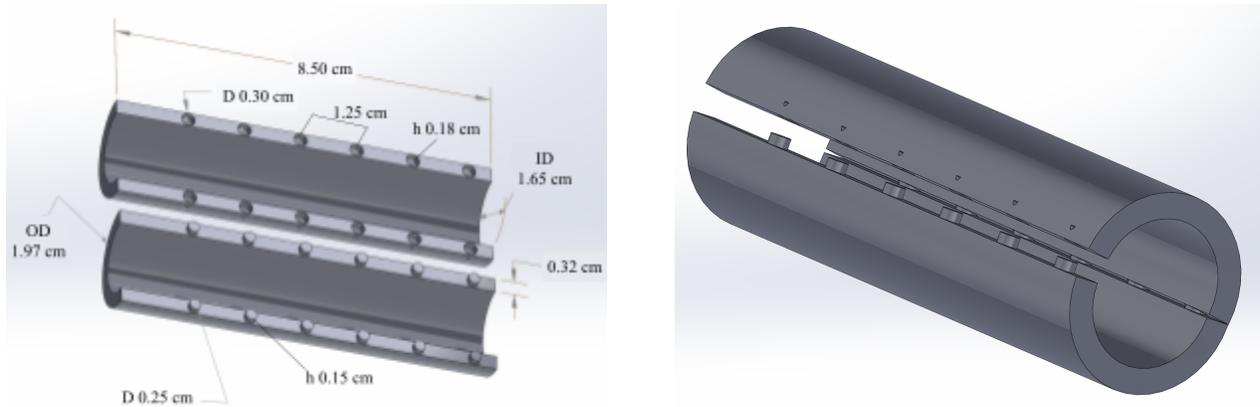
a-b: SolidWorks of the male and female halves of the Lego Clip Coring Design with dimensions; Solidworks of the two halves of the Lego Design clipping together.
